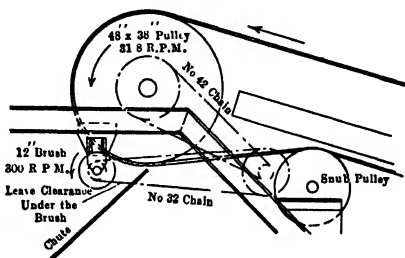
Head of Belt Conveyor and Drive for Cleaning Brush.
